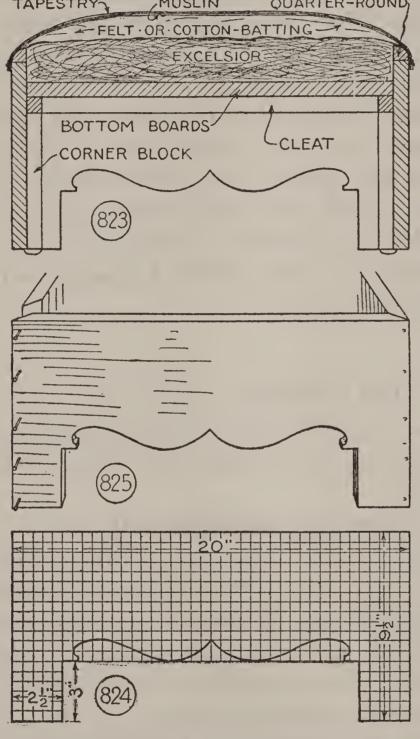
Cross-Section of Footstool Shown in Fig. 798.
